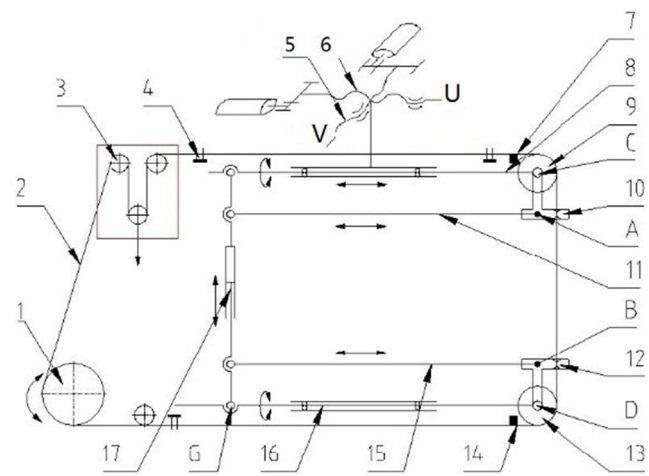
Schematic of the servo large taper-cutting mechanisms with six-bar linkage. 1—wire cylinder; 2—wire electrode; 3—constant tension unit; 4—zirconia fork; 5—V—leading screw; 6—U—leading screw; 7—upper linear axis; 8—upper conductive lump; 9—upper guide wheel; 10—upper traverse guider; 11—upper connecting rod; 12—lower traverse guider; 13—lower guide wheel; 14—lower conductive lump; 15—lower connecting rod; 16—lower linear axis; 17—sleeve connecting rod
